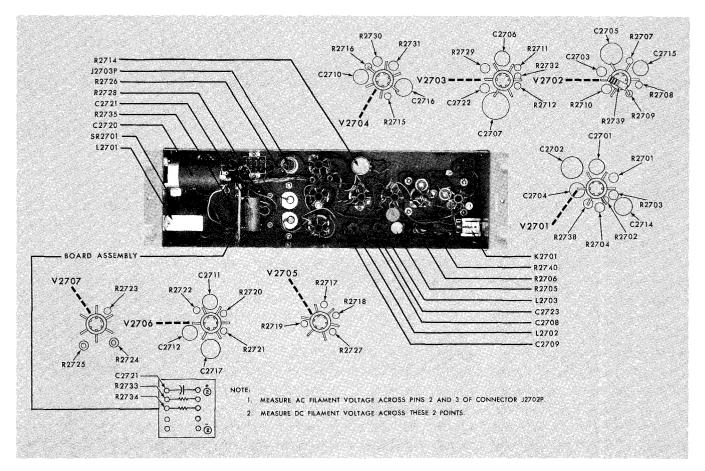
MASTER REPRODUCE PARTS LOCATION (INTERIOR VIEW)
